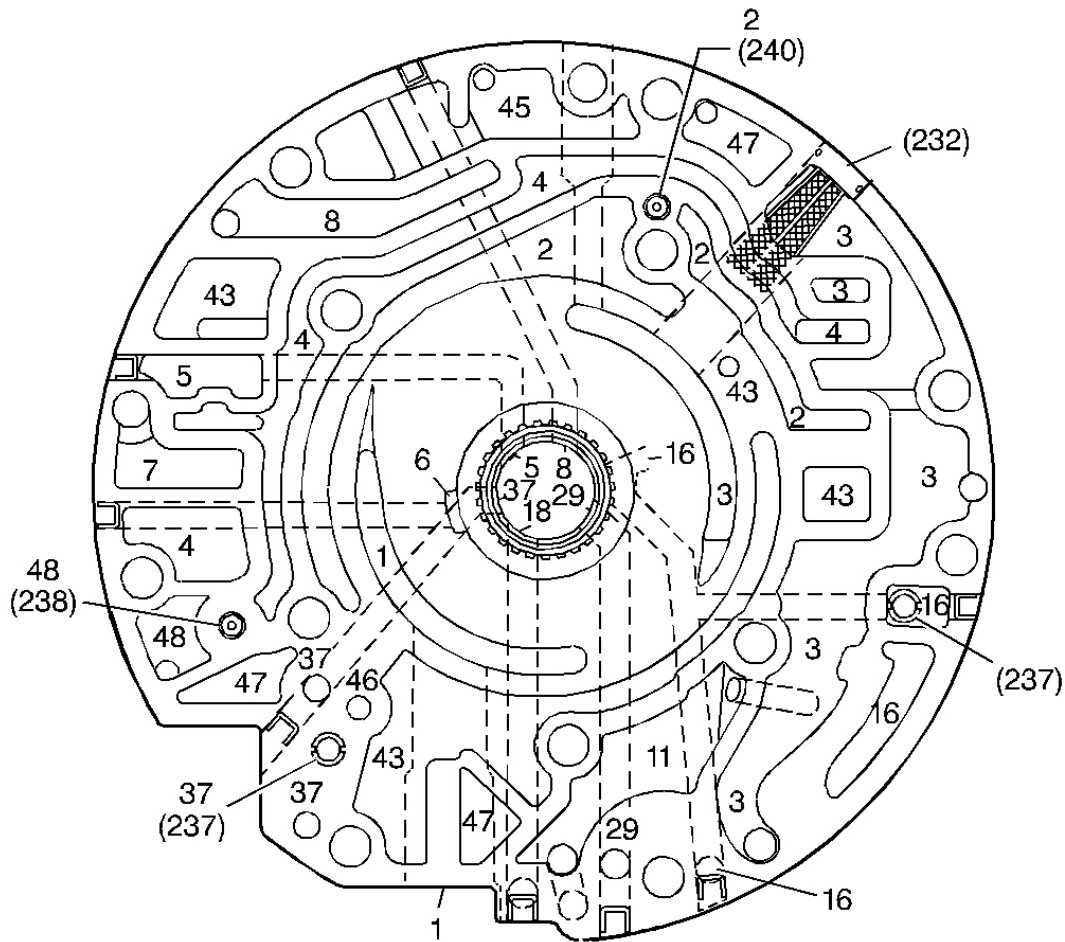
Pump Cover Fluid Passages (Pump Body Side)
